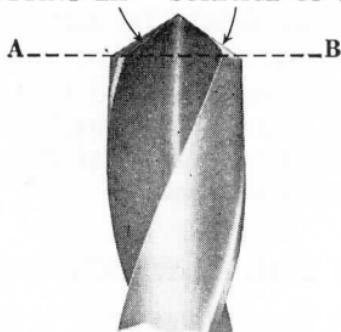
A drill point without any lip clearance. Note that corners of cutting lip A and of heel B are in the same plane
